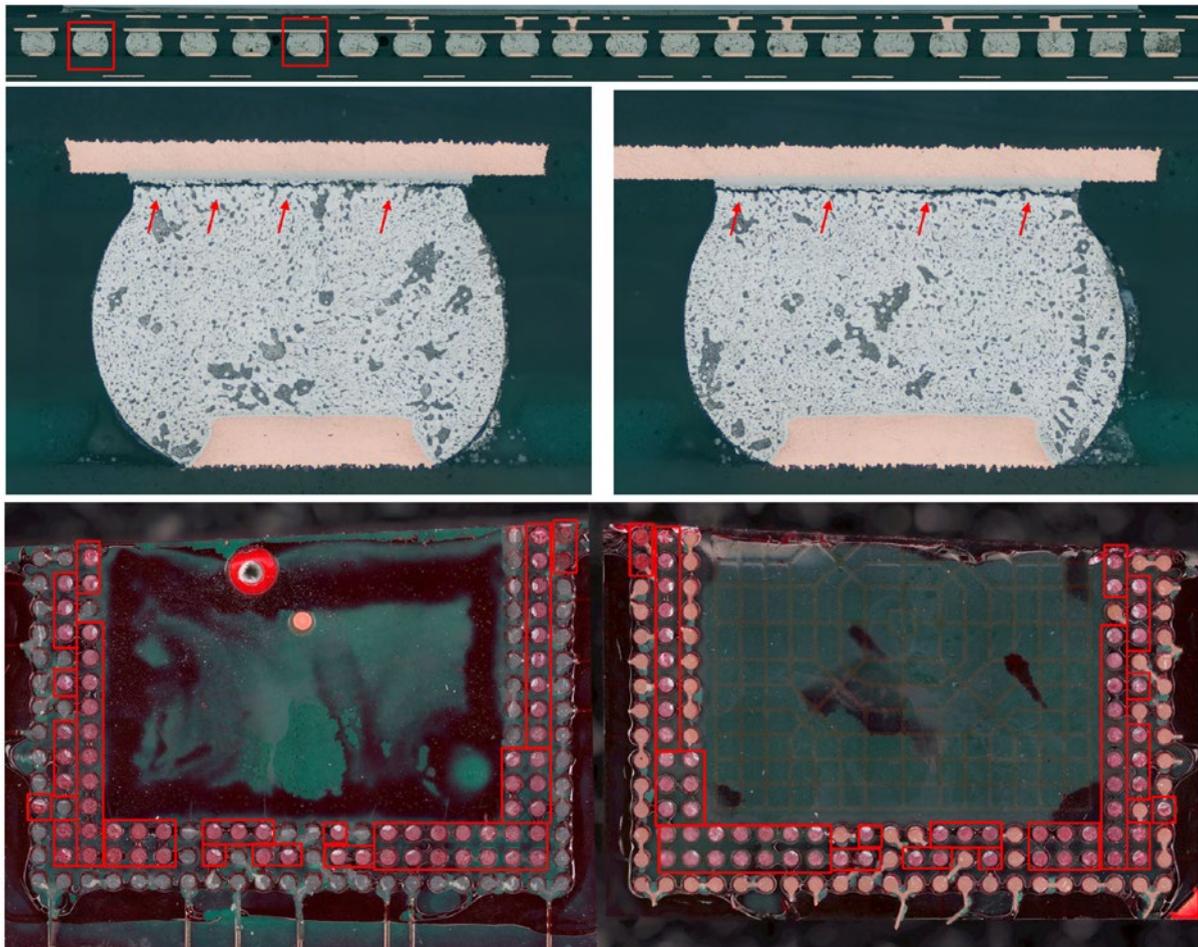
Cross-section and dye-and-pry images for CTBGA228 assembly at 3,000 biased cold TCs, which failed at 2188. Failures were in solder and at the package side.
